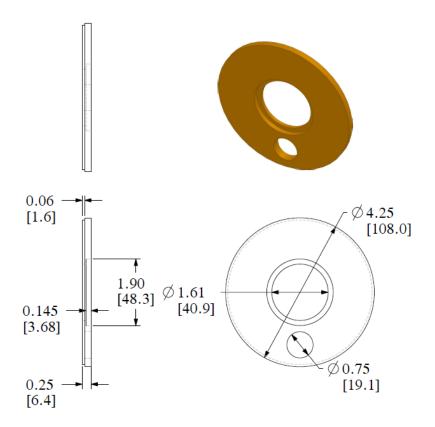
S-6. Dimensioned Drawing of the Back Plate
